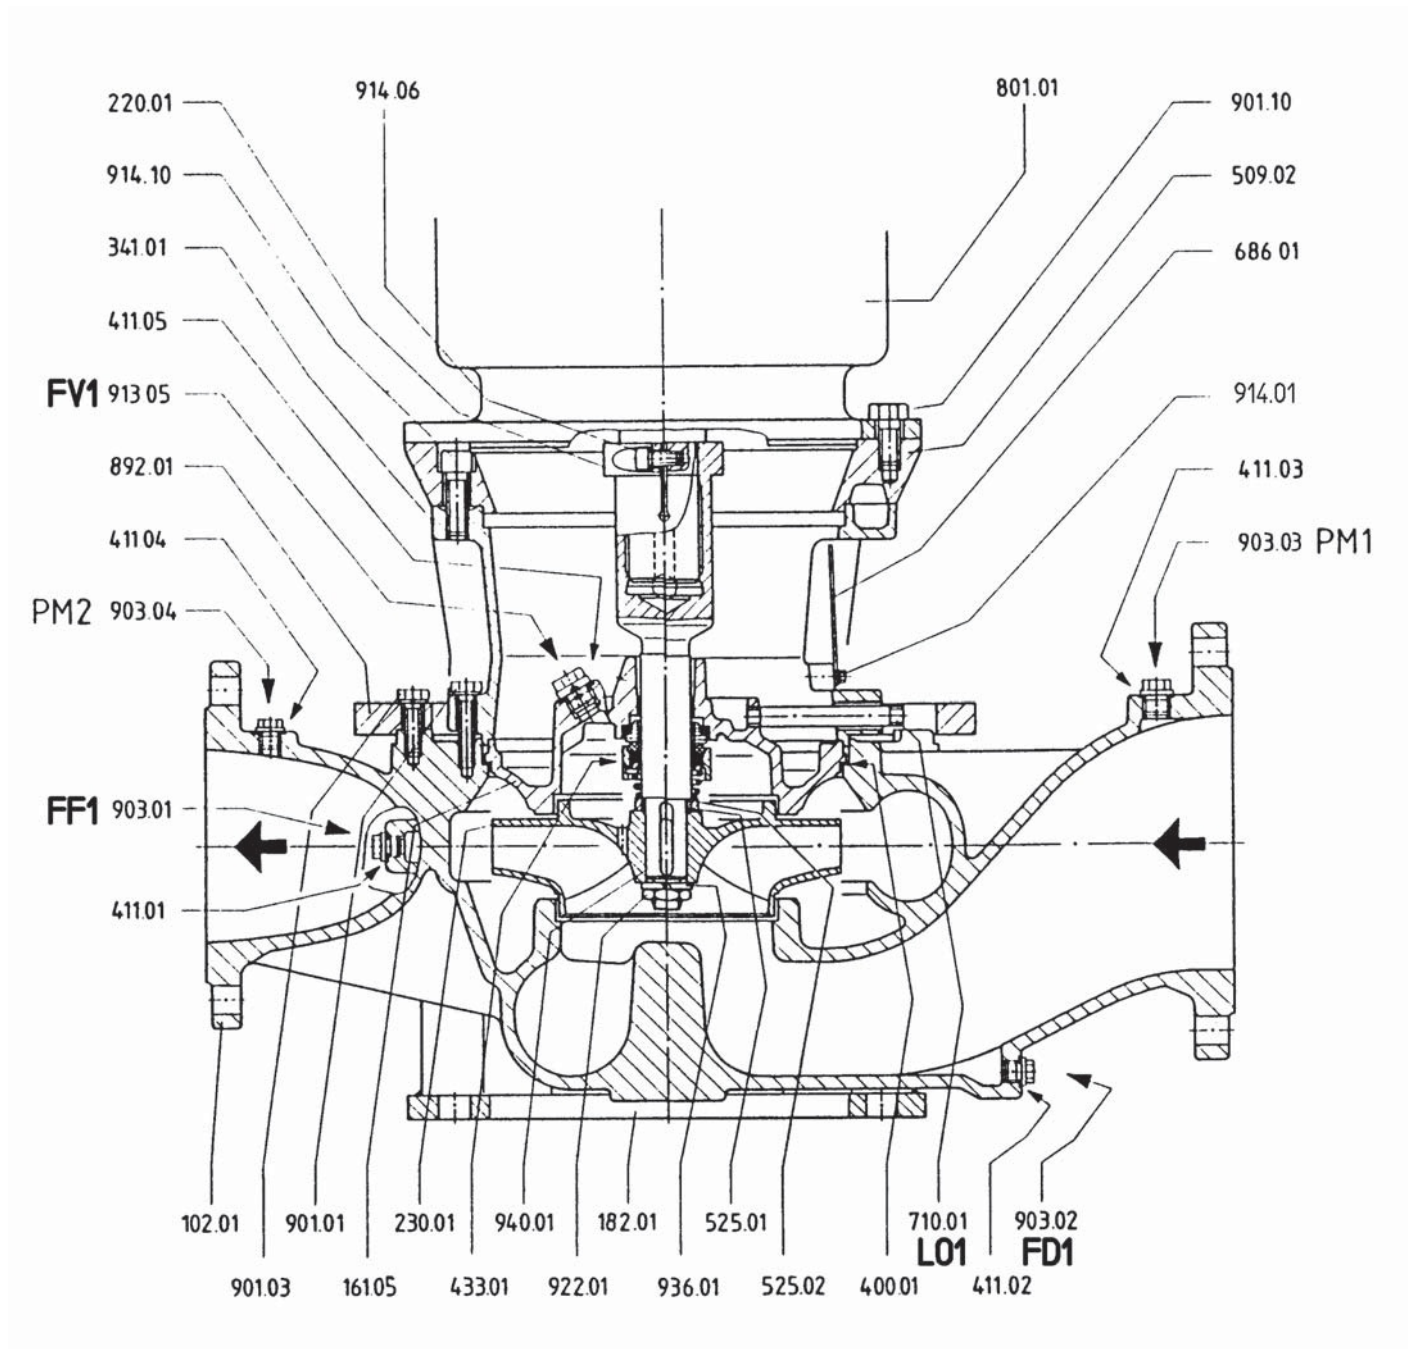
U3...D - Unbalanced, uncooled mechanical seal
